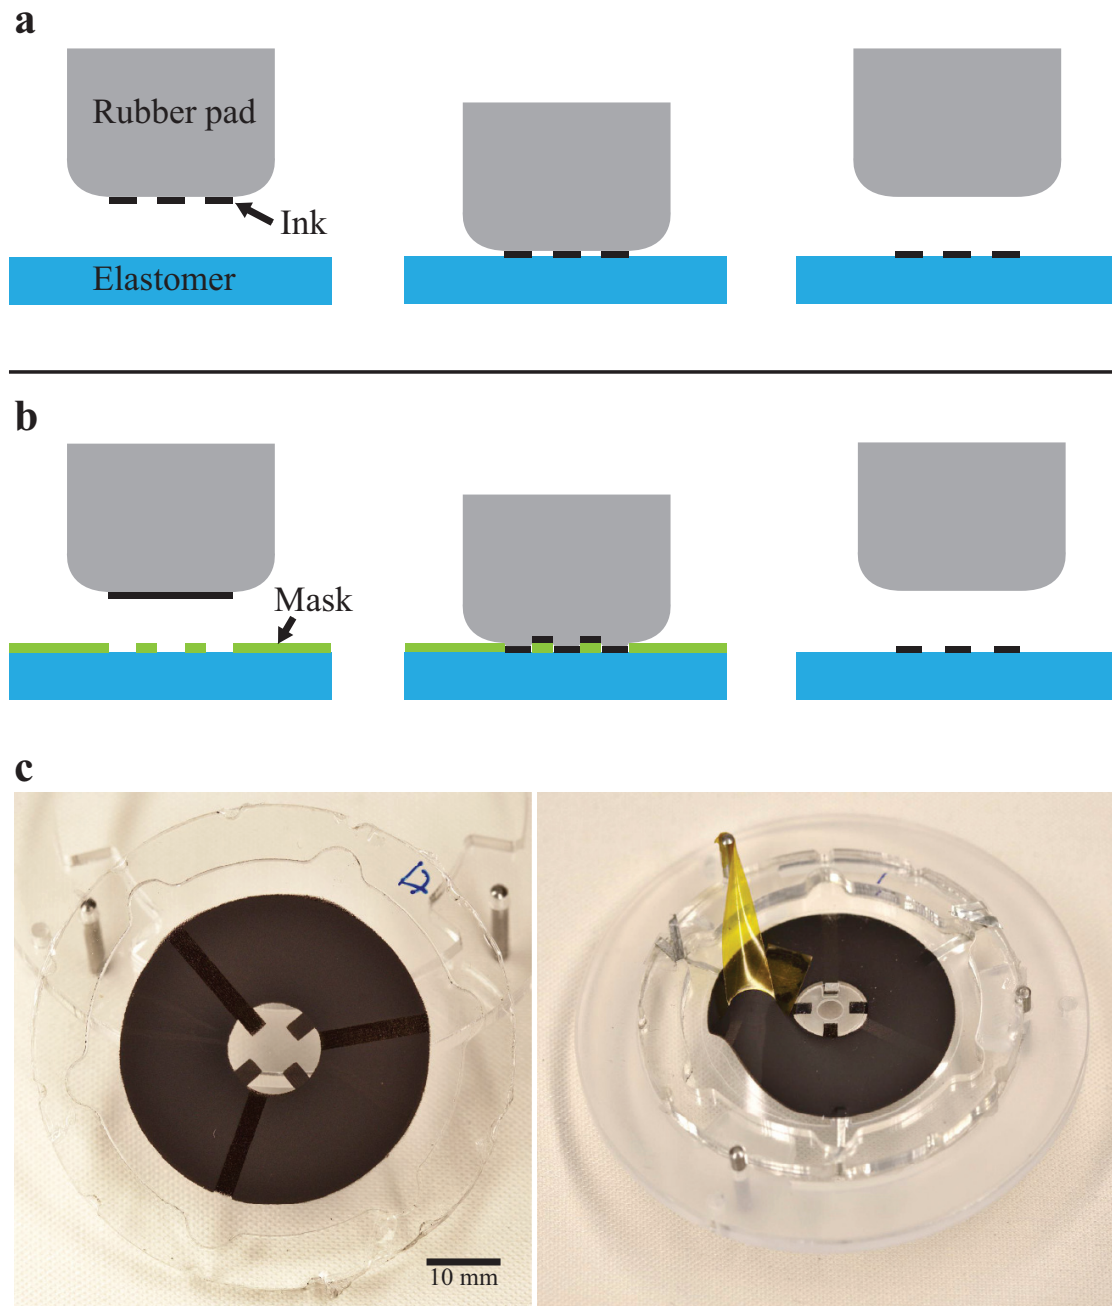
Patterning of elastomeric electrodes by pad-printing. (a) The pad transfers ink with the desired electrode geometry from an etched steel plate. The ink is then stamped onto the elastomer surface. After curing, electrodes with thickness of 1-3.5 μm are formed on the surface. (b) Instead of using an etched plate, a shadow mask can also be used. In this case, the pad stamps the ink with dimension larger than the desired electrode geometry. The pad deforms according to the mask geometry. Due to this deformation, the resulting electrode dimension is slightly smaller than that of the mask. (c) (left) A DEA with pad-printed electrodes. (right) The electrodes show a strong resistance to damage (a Kapton tape is adhered and removed with no exfoliation). The pictures are adopted from [182].
